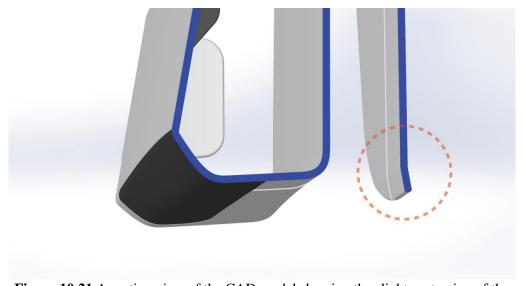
A section view of the CAD model showing the slight protrusion of the lowest part of the back attachment
